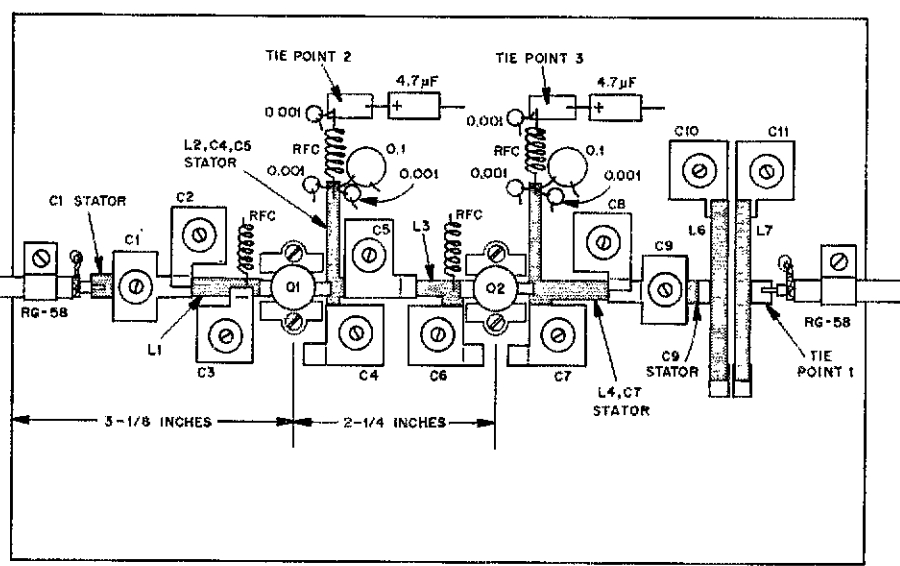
Circuit board layout of the completed amplifier. Begin construction by measuring the center-to-center distance from Q1 to Q2 and then mount the transistors, working away from them as you mount the other components. Use great care when mounting and soldering the transistors into the circuit to avoid damaging them. The PC board measures 9½ in. x 6 in., and is made from double-sided, glass-epoxy material (Meshna PCB28—see note 1).
